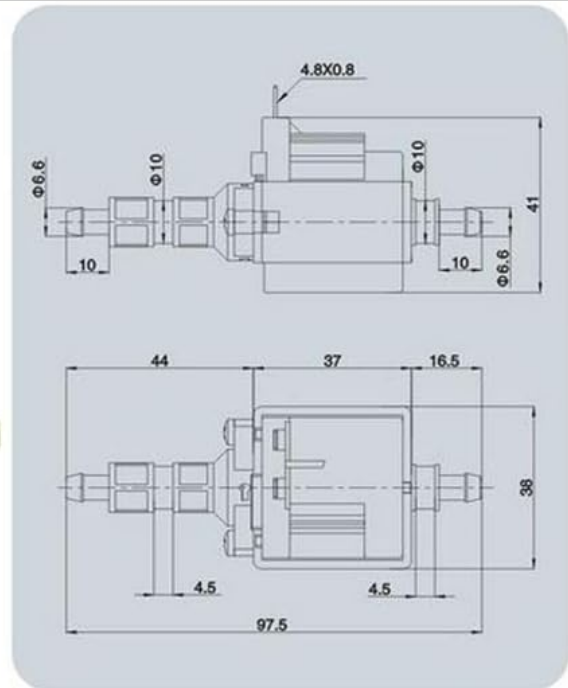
Detailed dimensional drawing of the JIAYIN JYPC-3 pump, showing key measurements in millimeters and inches.
